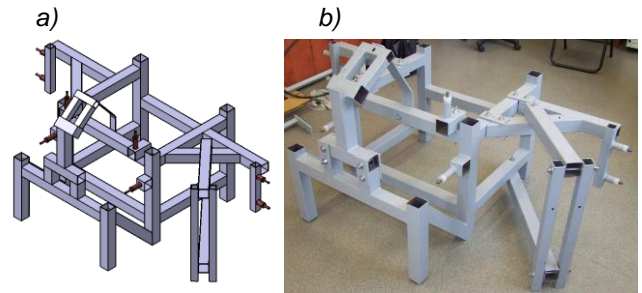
Design of test bench: a) in CAD environment, b) under laboratory conditions
